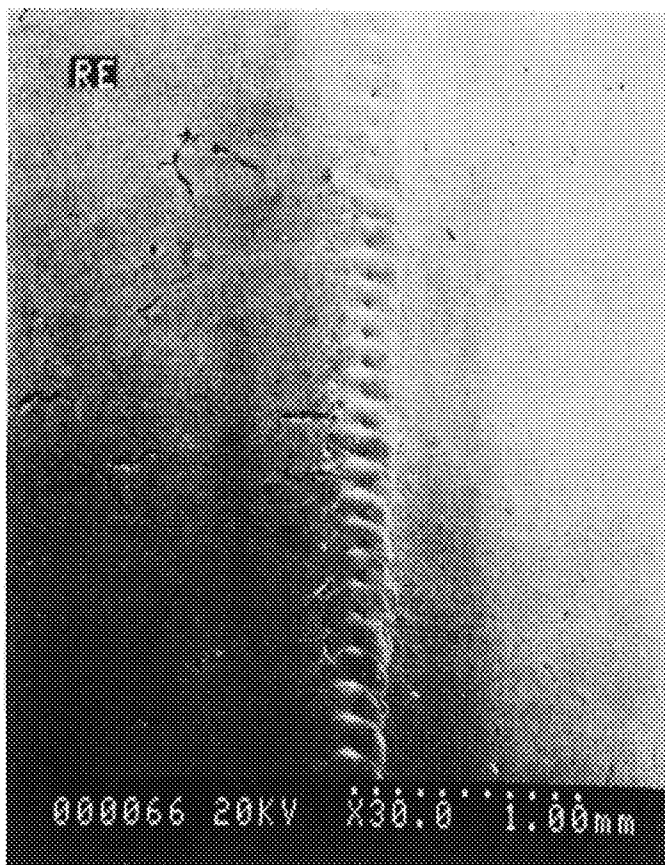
Electron Beam Welds on Rhenium DTC Specimen
